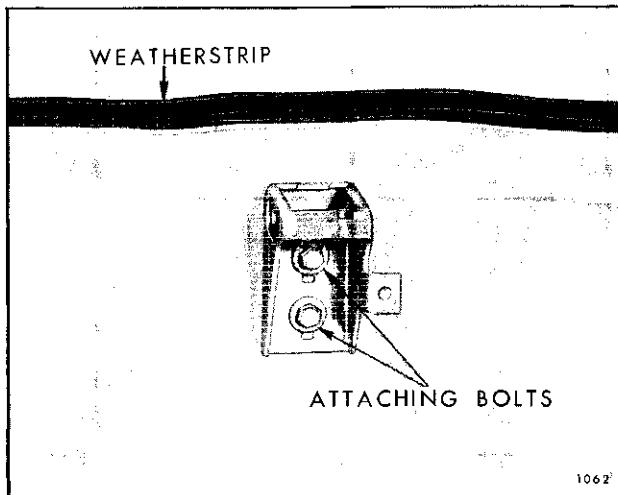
Engine Compartment Lid Latch Striker - "Z" Styles
